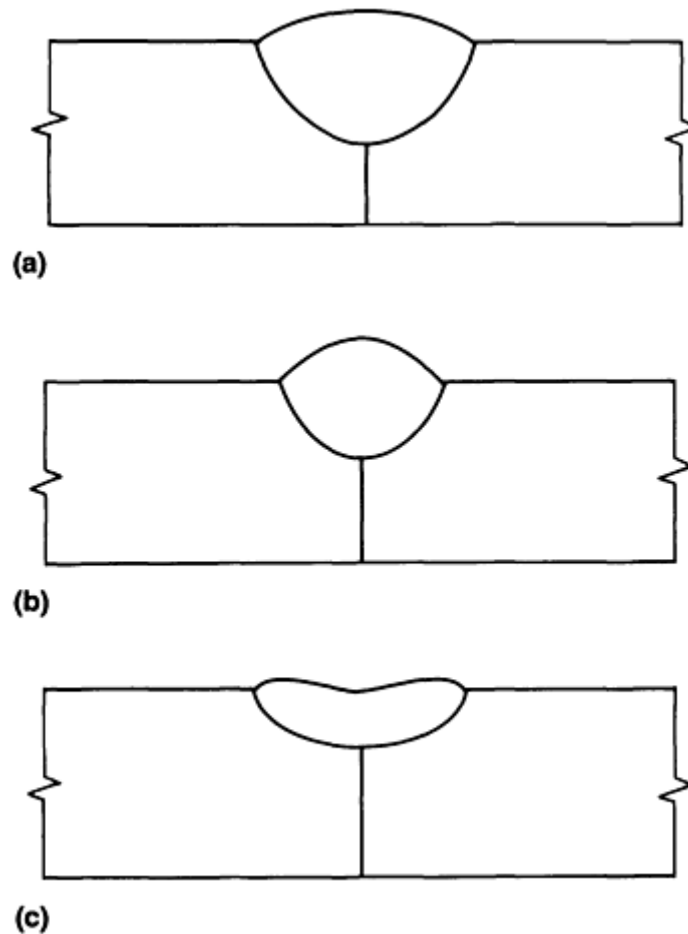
WELD PROFILES. (A) CONTOUR OF A WELD BEAD IN THE FLAT POSITION WITH THE WORK HORIZONTAL. (B) WELDING SLIGHTLY UPHILL. (C) WELDING SLIGHTLY DOWNHILL. SOURCE: REF 26
